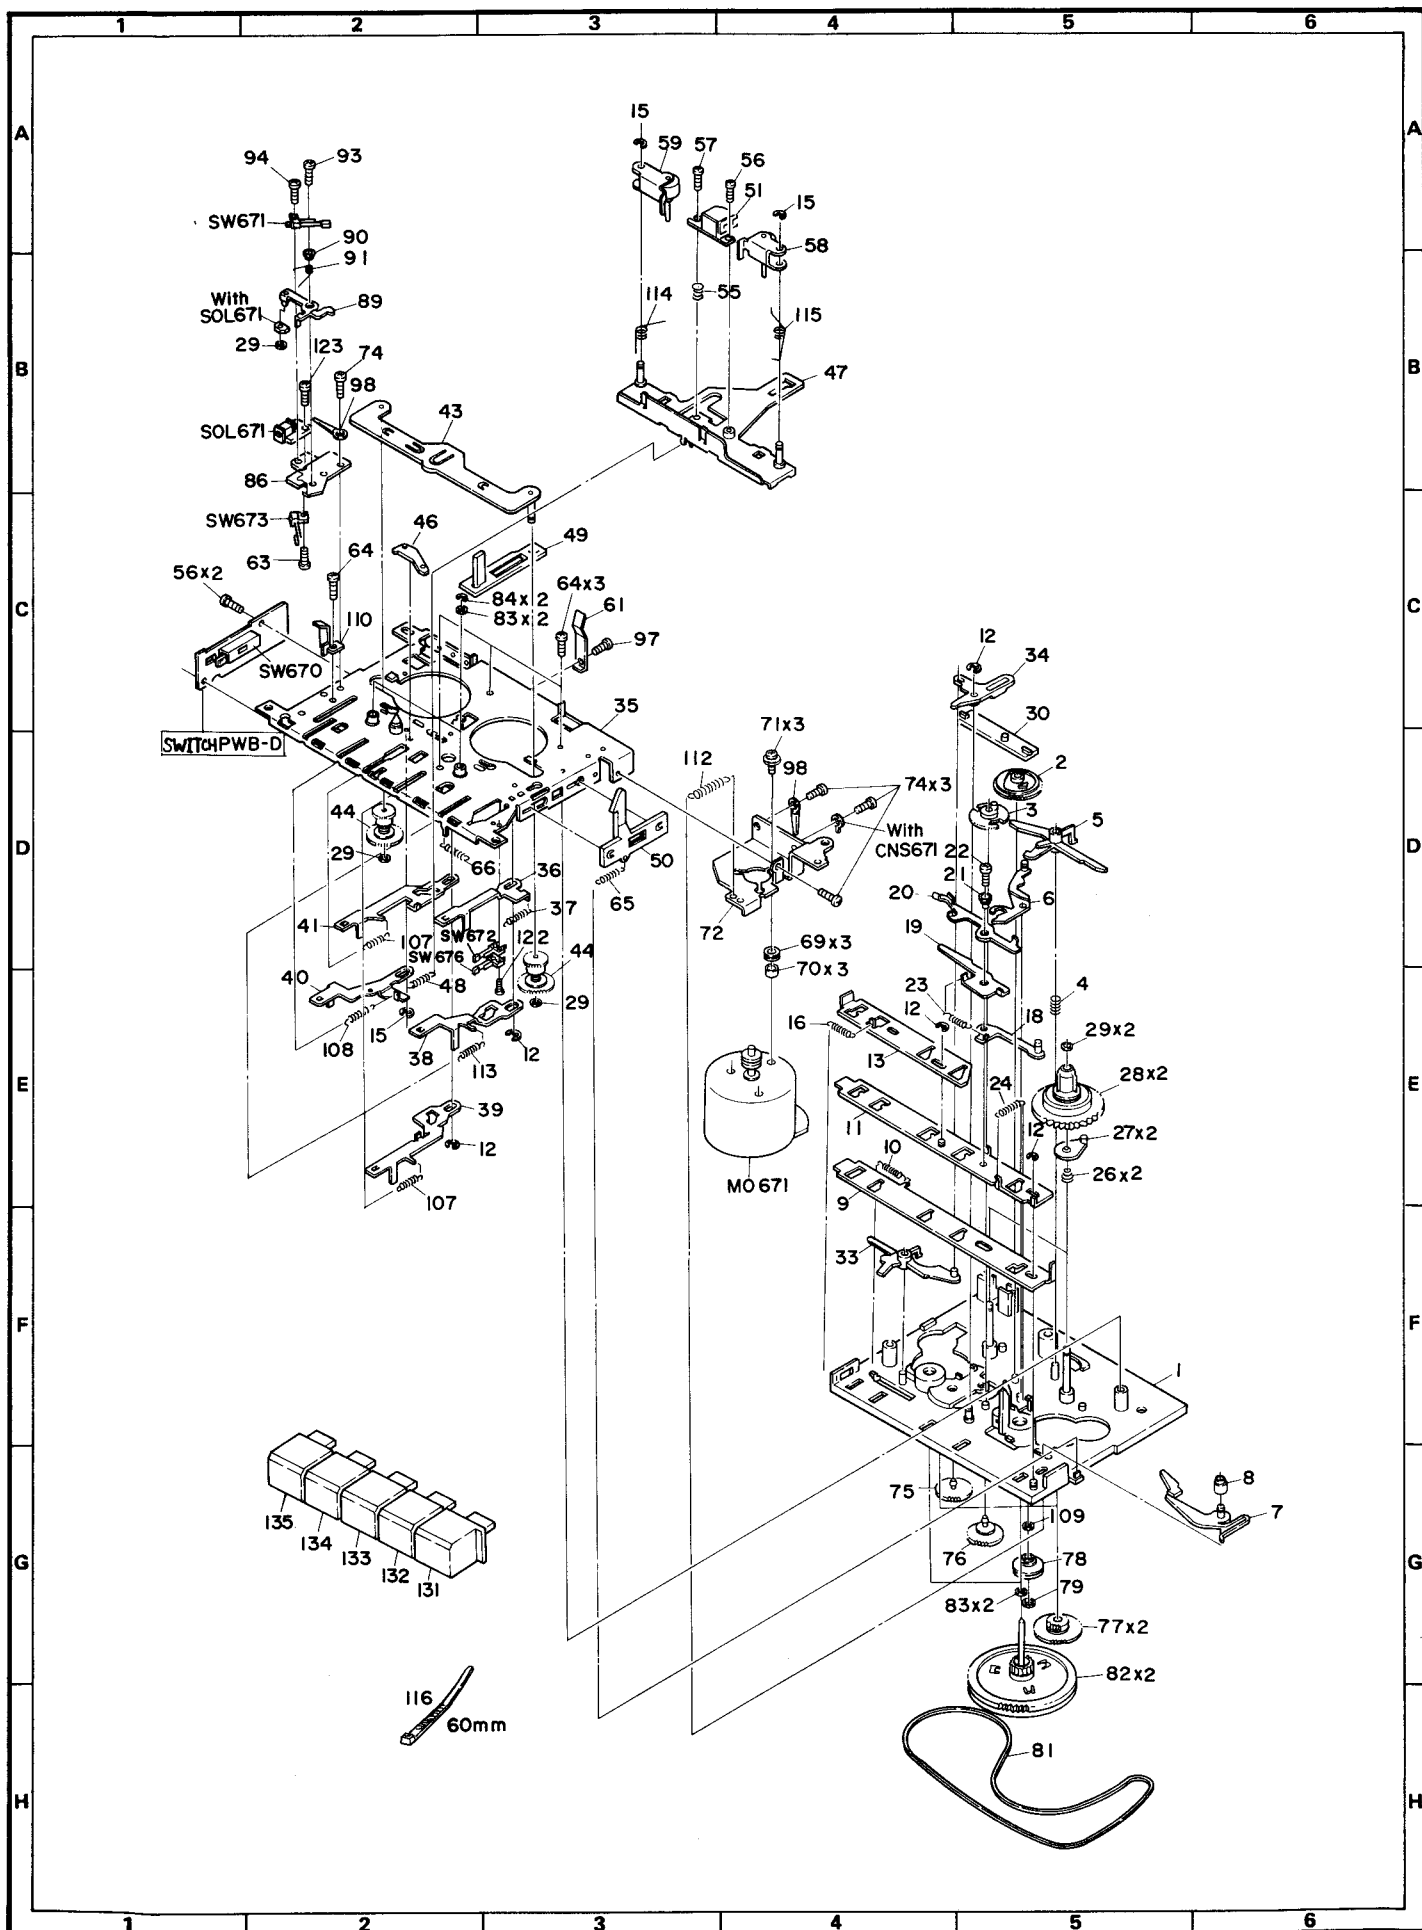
DECK 1 MECHANISM EXPLODED VIEW
